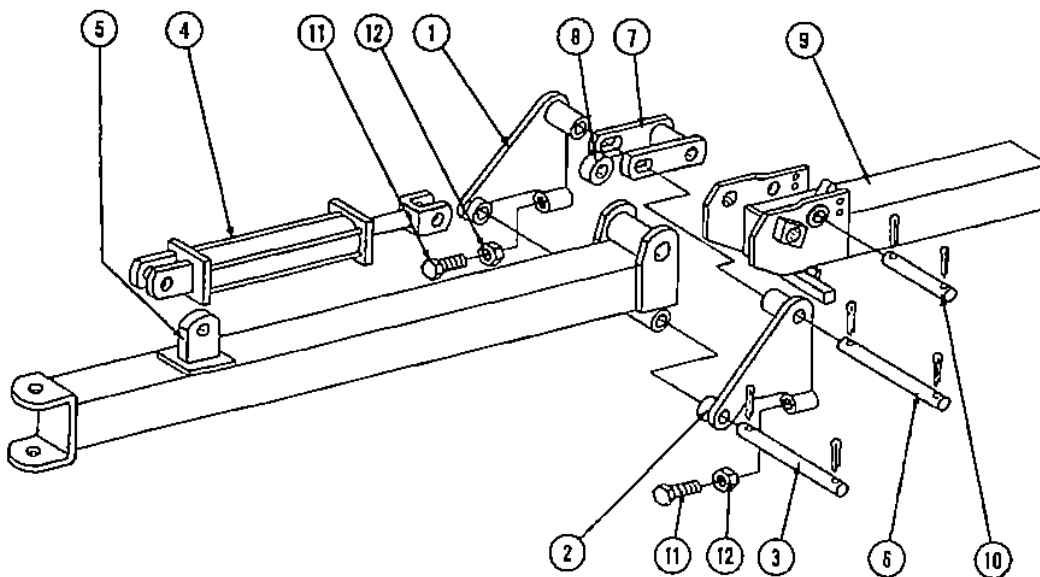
HYDRAULIC FOLDING ASSEMBLY
